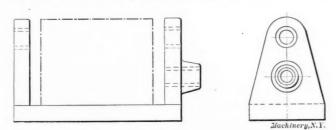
Boring Jig in which One Bar has Single and One Double Bearing.
